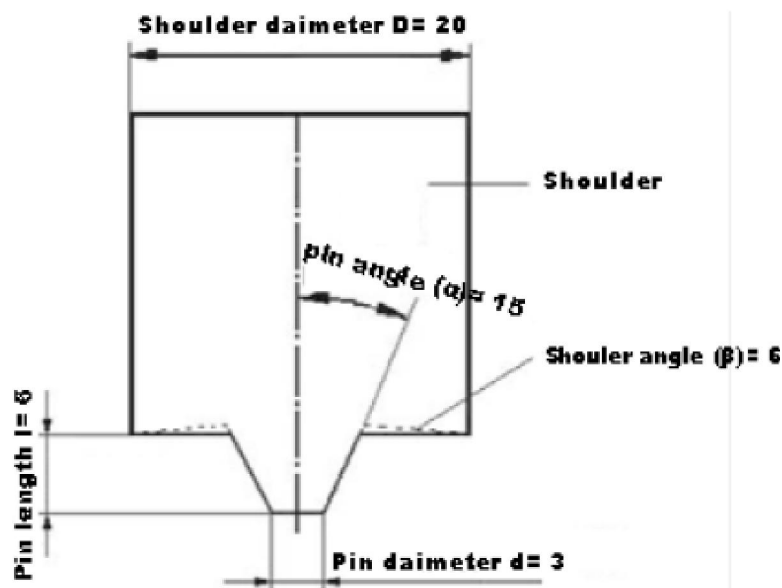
A schematic illustration of FSSW tool (dimension in mm)
